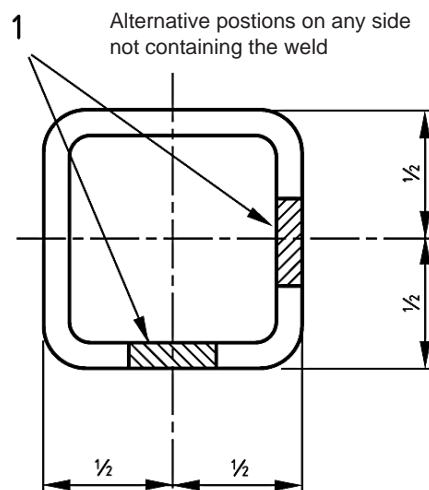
Location of impact test piece of rectangular hollow sections to EN 10219-1 [8]
